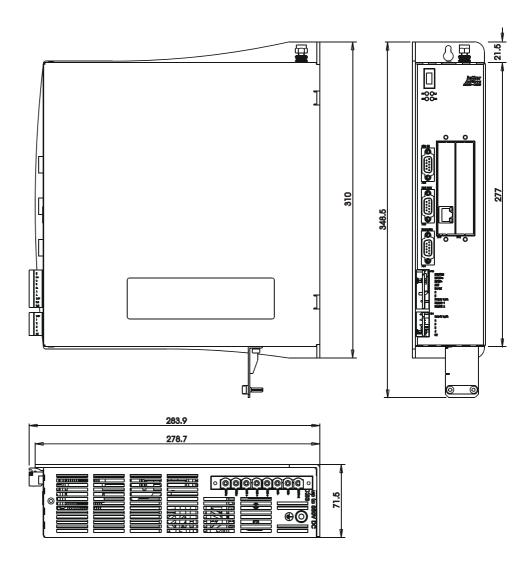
Mounting dimensions of the JetMove 204-480 (in mm)
